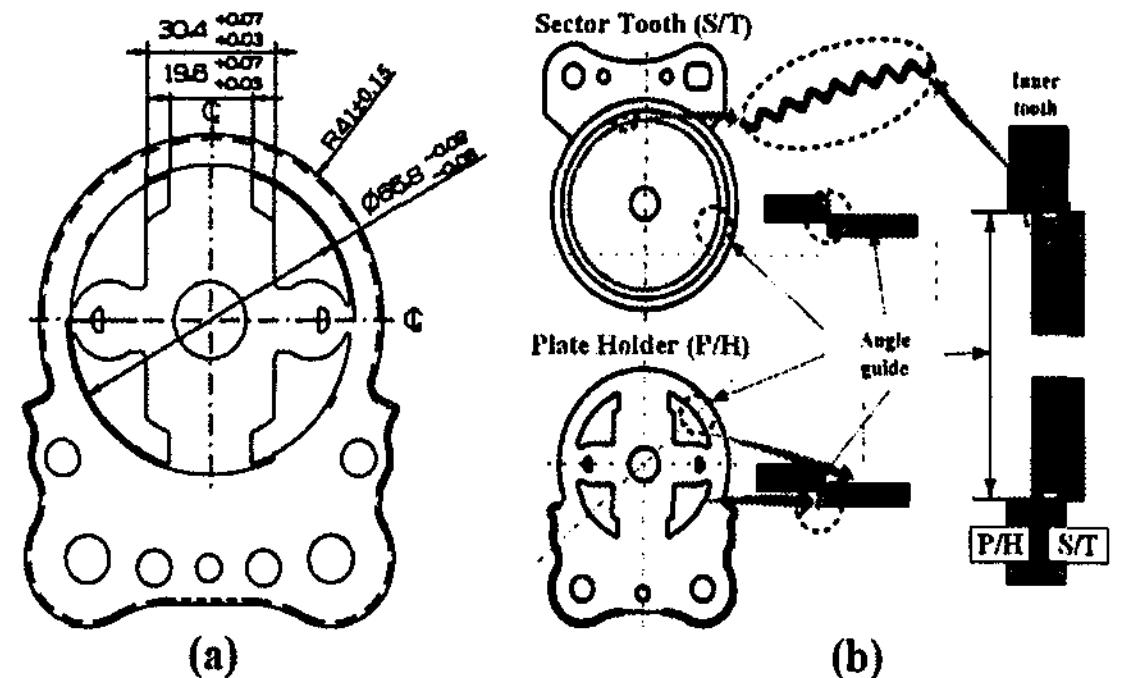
Schematic drawing of plate holder(a) and sector tooth(b)
